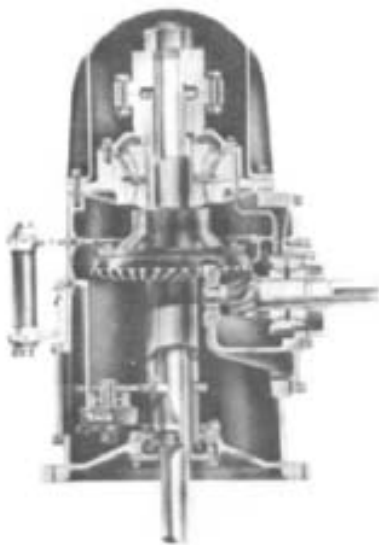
Cross section of spiral-bevel vertical pump drive
